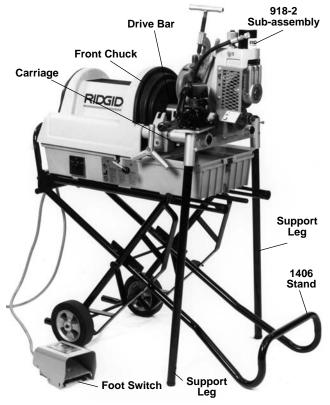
918 Roll Groover Mounted on 1822 with 1406 Stand
